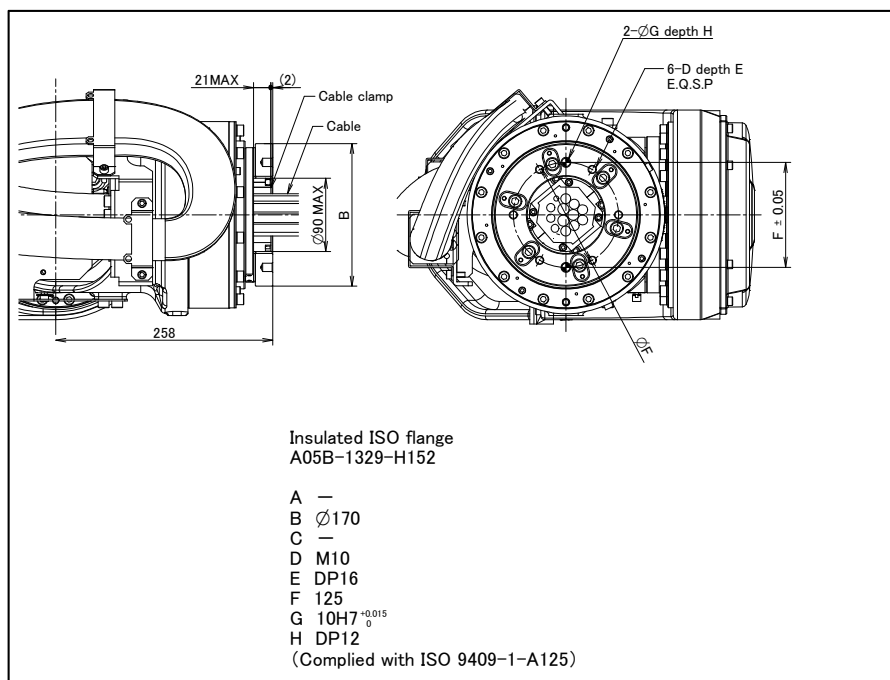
(j) End effector mounting face (Insulated ISO flange) (R-2000iB/210FS/220US)
